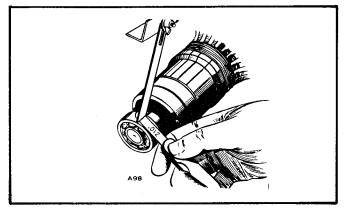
CHECKING COMMUTATOR RUNOUT
